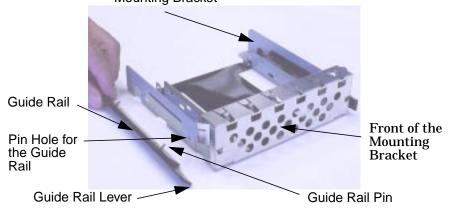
Removing the Hard Disk Drive from Its Mounting Bracket
